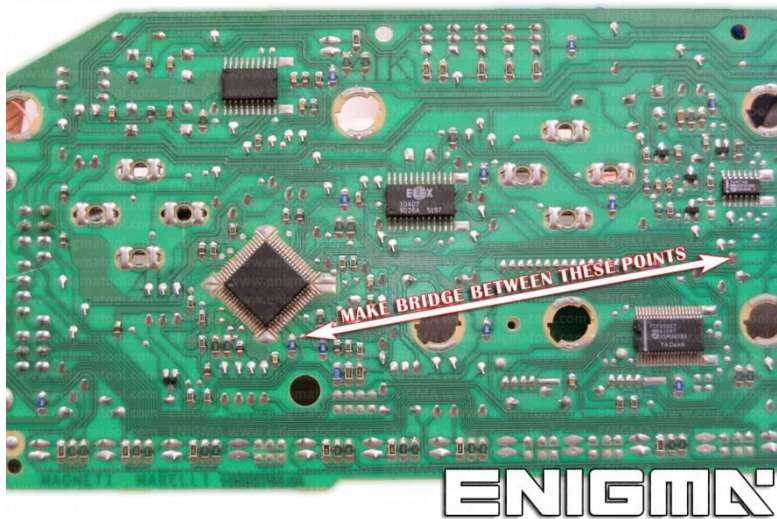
Make BRIDGE between two points as shown on the photo above.
